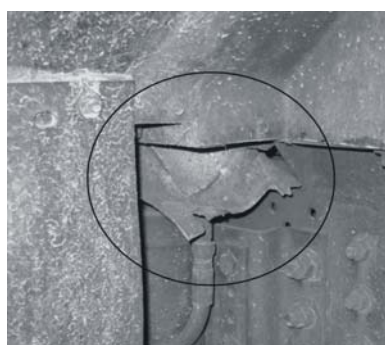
Passenger side rear wheel well bracket aft of the axle is broken.
